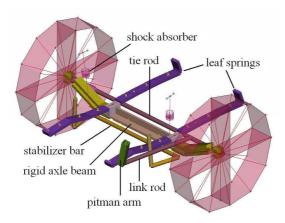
Model of the rigid axle beam with leaf spring suspension.
